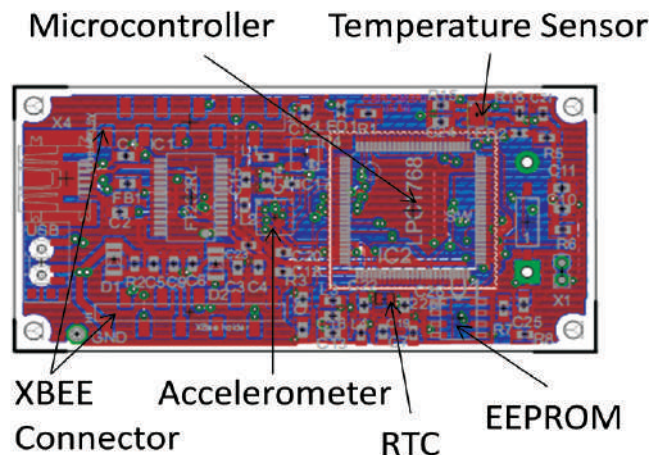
4 layer printed circuit board (5.8cm X 2.9cm)
